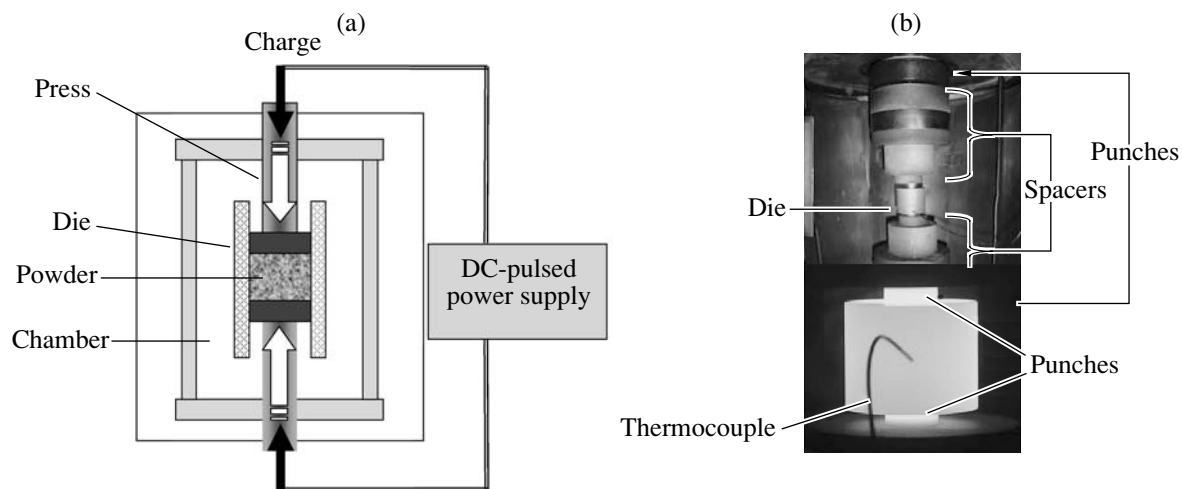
(a) General sketch of an SPS machine and (b) overall view of the mould environment (above) and of the hot mould during experiment (below).
